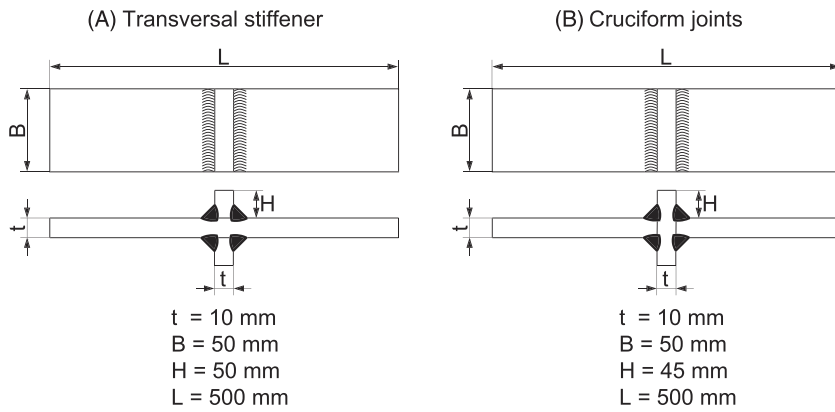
Specimen geometries of the two weld details analysed in this paper: (A) transversal stiffener and (B) cruciform joint
